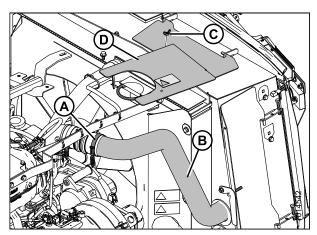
Charge Air Cooler Tube and Exhaust Shroud (Exhaust Stack Removed for Clarity)
